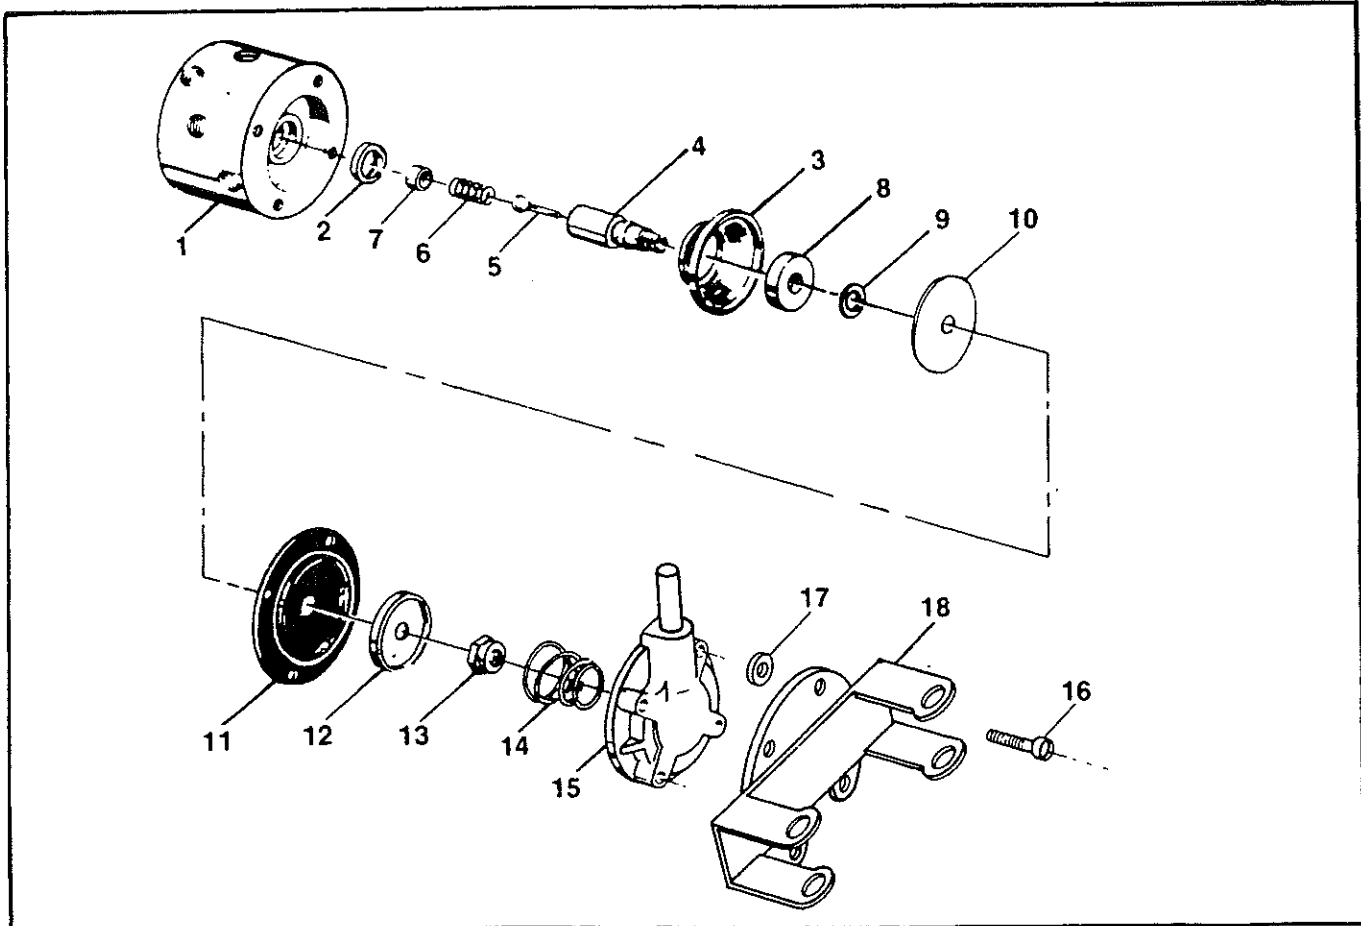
FUEL MANIFOLD VALVE ASSEMBLY.
